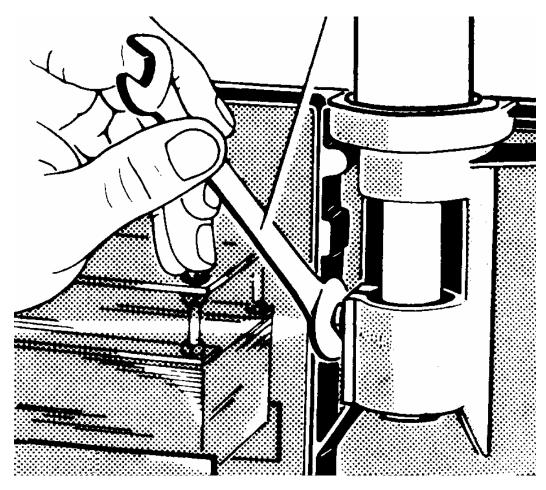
Open-end wrench 13mm--`1/2 inch.
